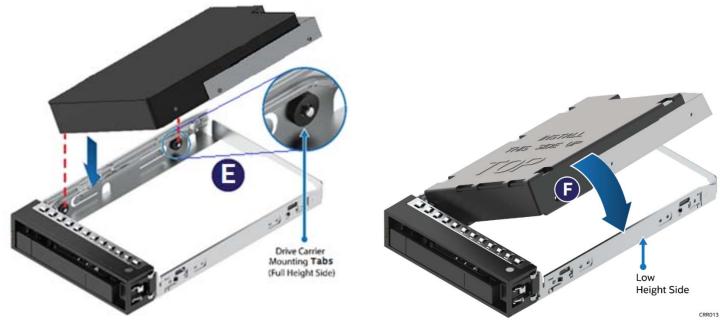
3.5" Drive Carrier to 2.5" SSD Bracket – Mount Bracket Assembly to Carrier
